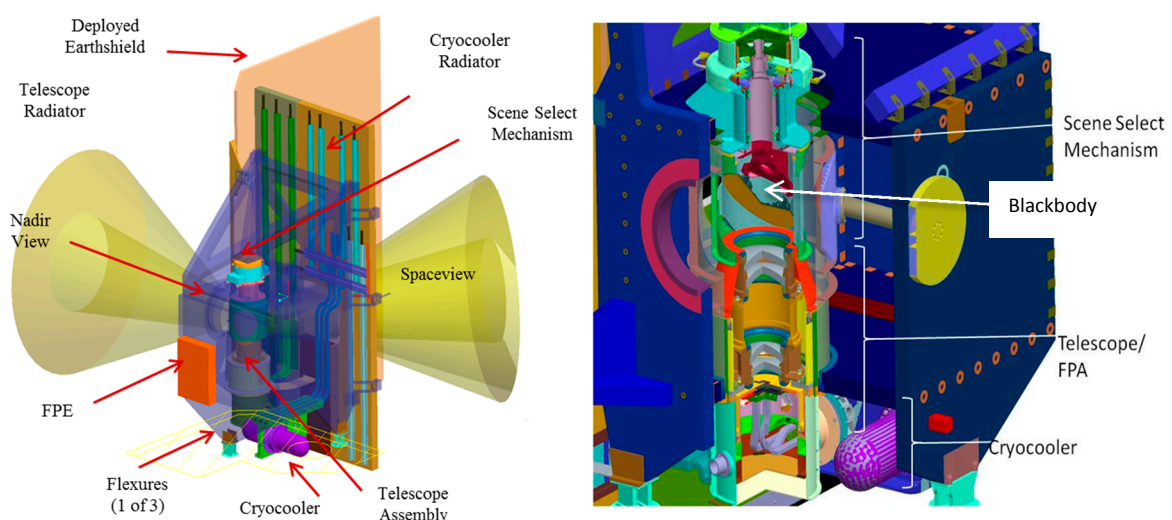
(Left) TIRS sensor unit with Earth shield deployed and showing FOVs. (Right) Drawing of the optical system, including the SSM, the four lens elements and the focal plane assembly. At the bottom, the cryocooler and the heat straps used to cool the FPA are shown. The blackbody calibration source is shown with its attached radiator.
